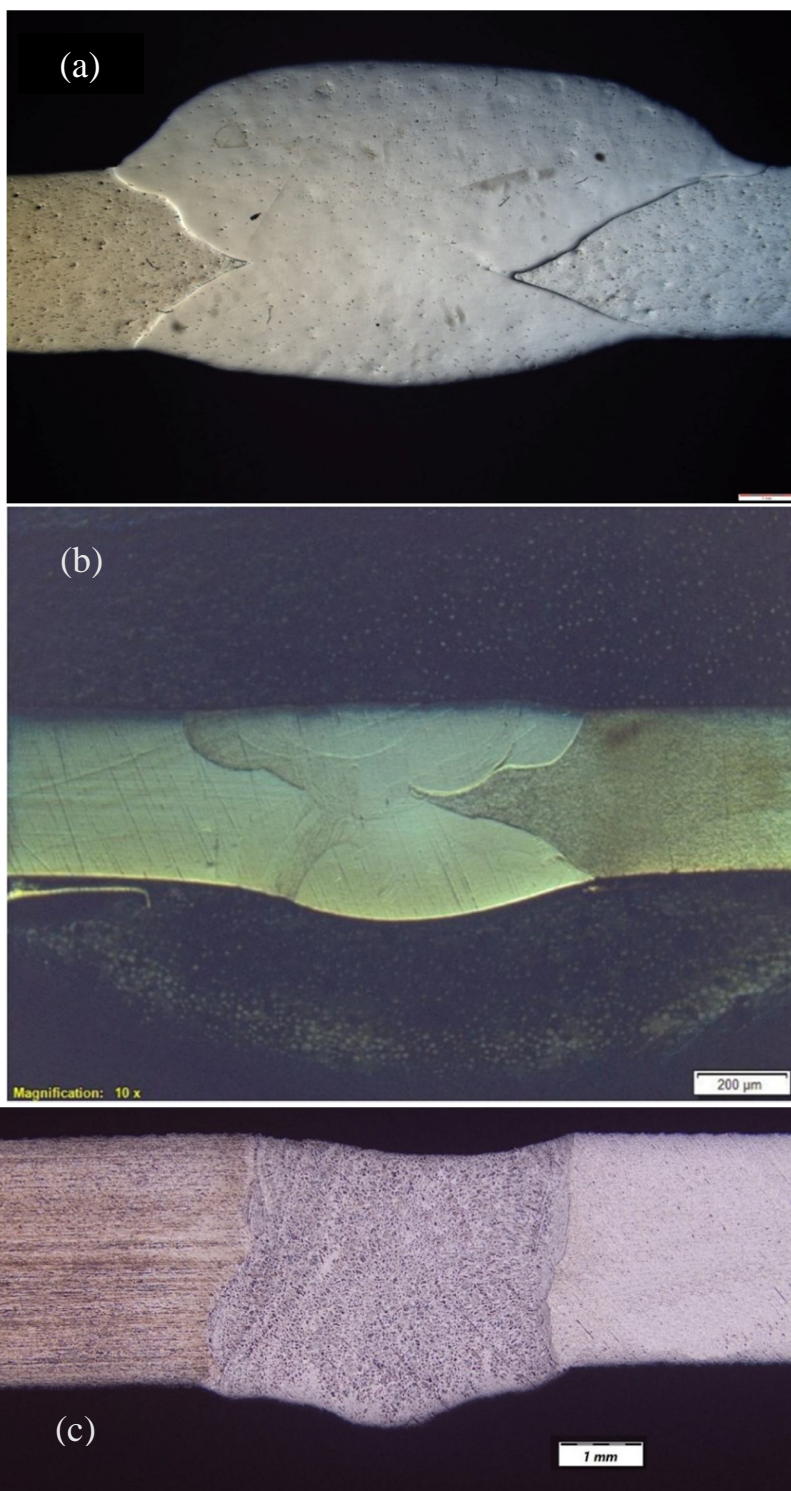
Macroscopic appearance of dissimilar joints: (a) GTAW, (b) FSW, (c) LBW
